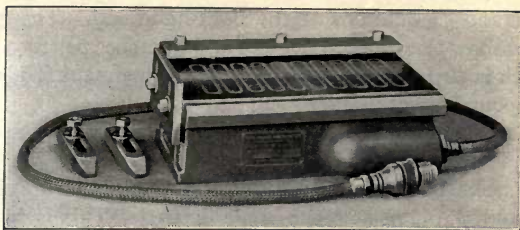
Heald magnetic chuck for use on the surface grinder.
